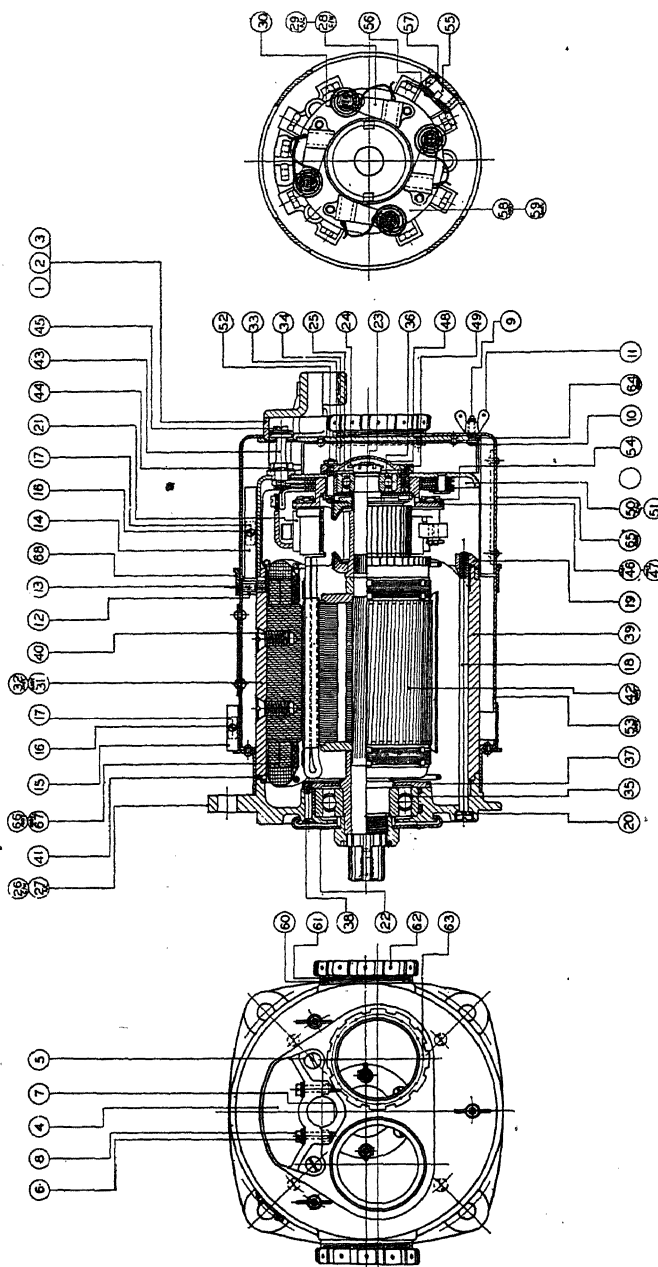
SECTIONAL DRAWING OF ROTAX 500-WATT GENERATOR
